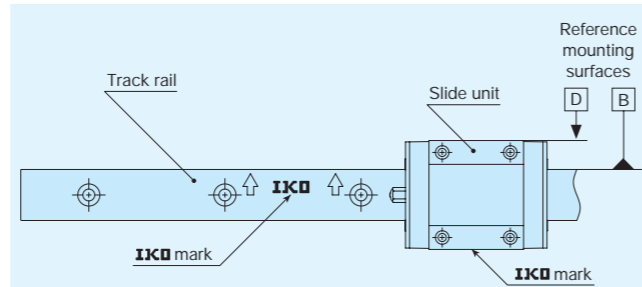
C-Sleeve Linear Way ML, ME and MH Reference mounting surfaces
